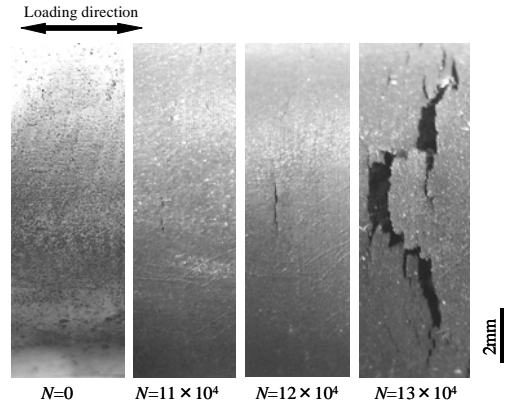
Fatigue crack of plain specimens and behavior of fracture surface in Test C.
